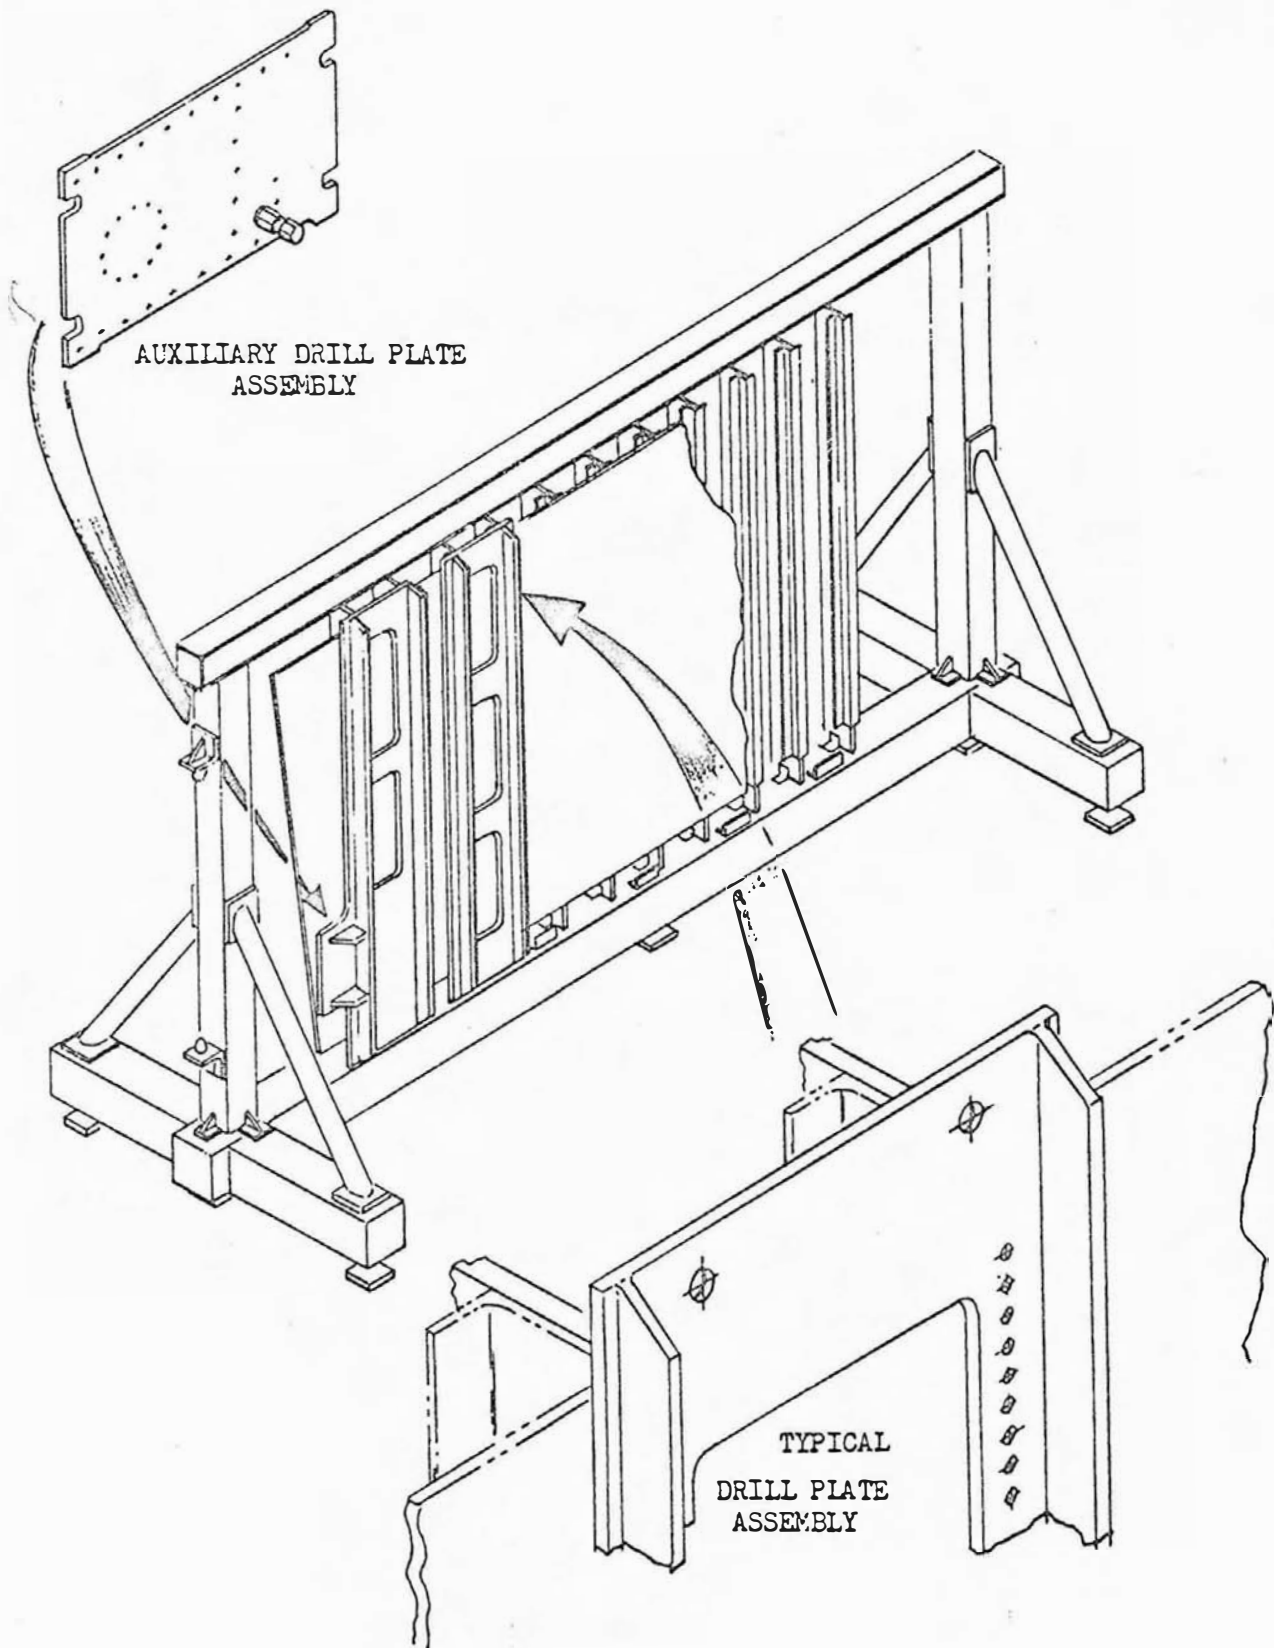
Center Engine Support Web Assemblies Assembly Fixture
